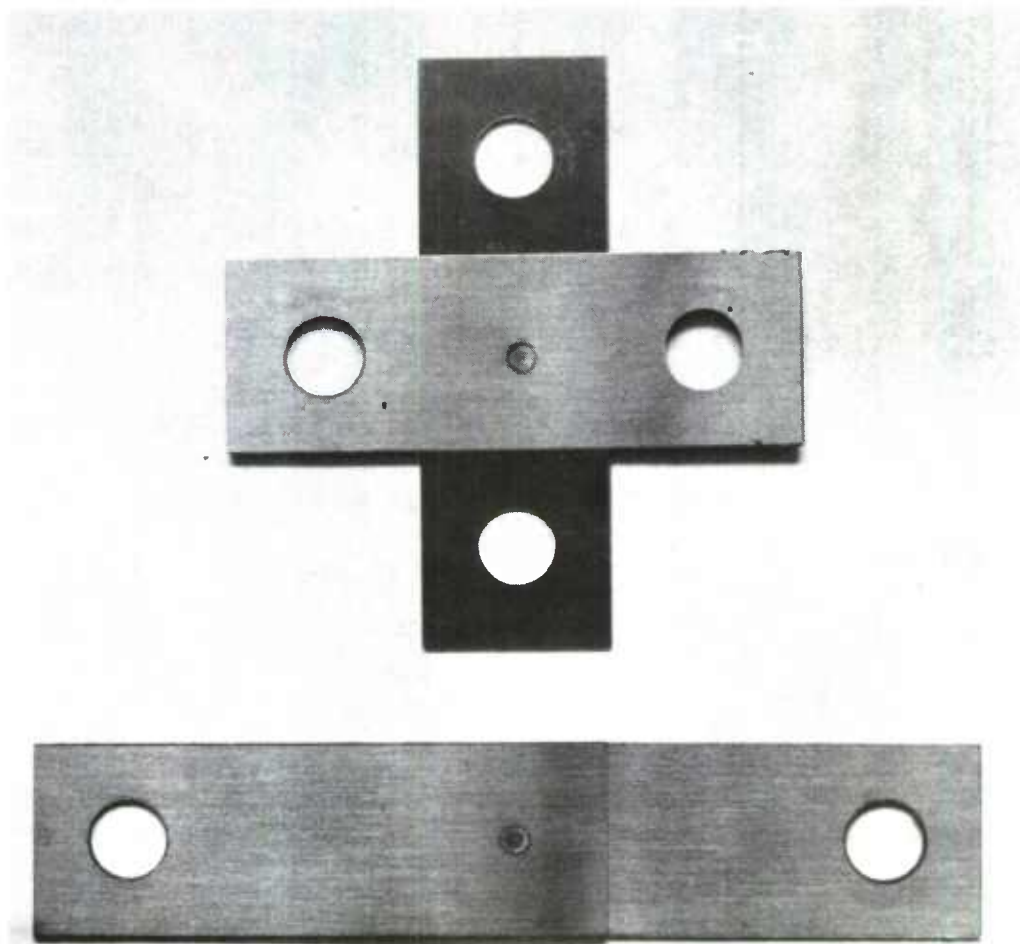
Photograph of Spot Welded Tension and Shear Specimens
